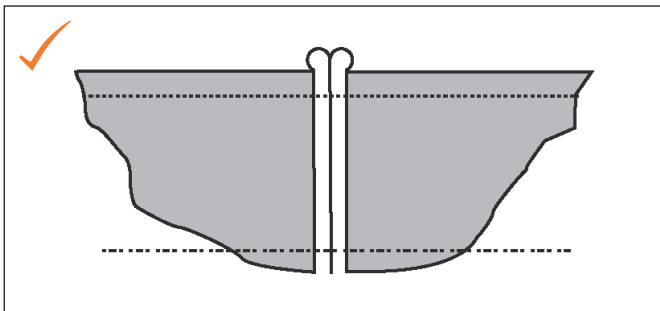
Butt-weld with big welding beads (acceptable)
